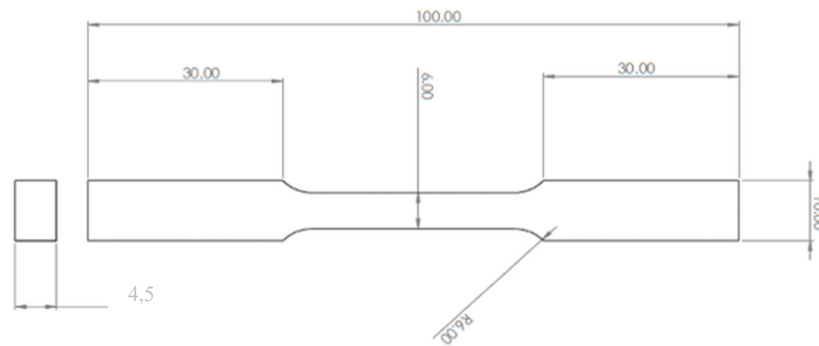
4: Dimensions of tensile tests specimen (All dimensions are in mm)
